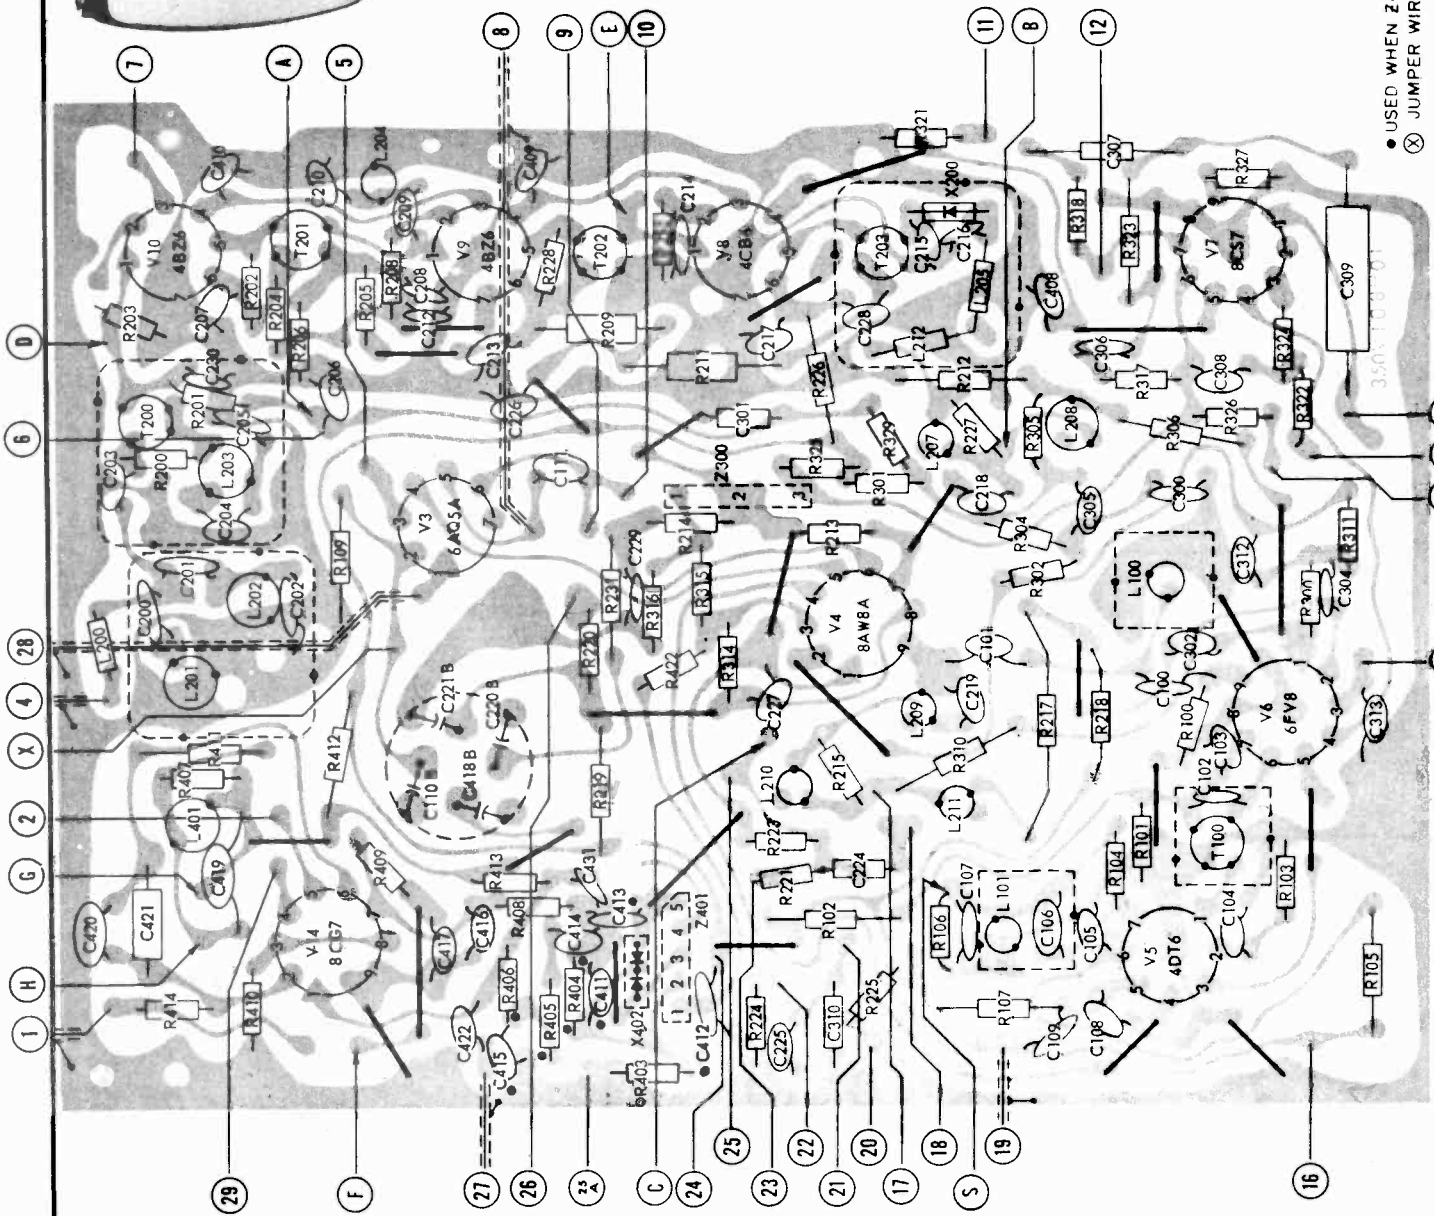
Bottom view of PC board showing location of top components in solid outlines. Tube pin numbering is for bottom of socket.
